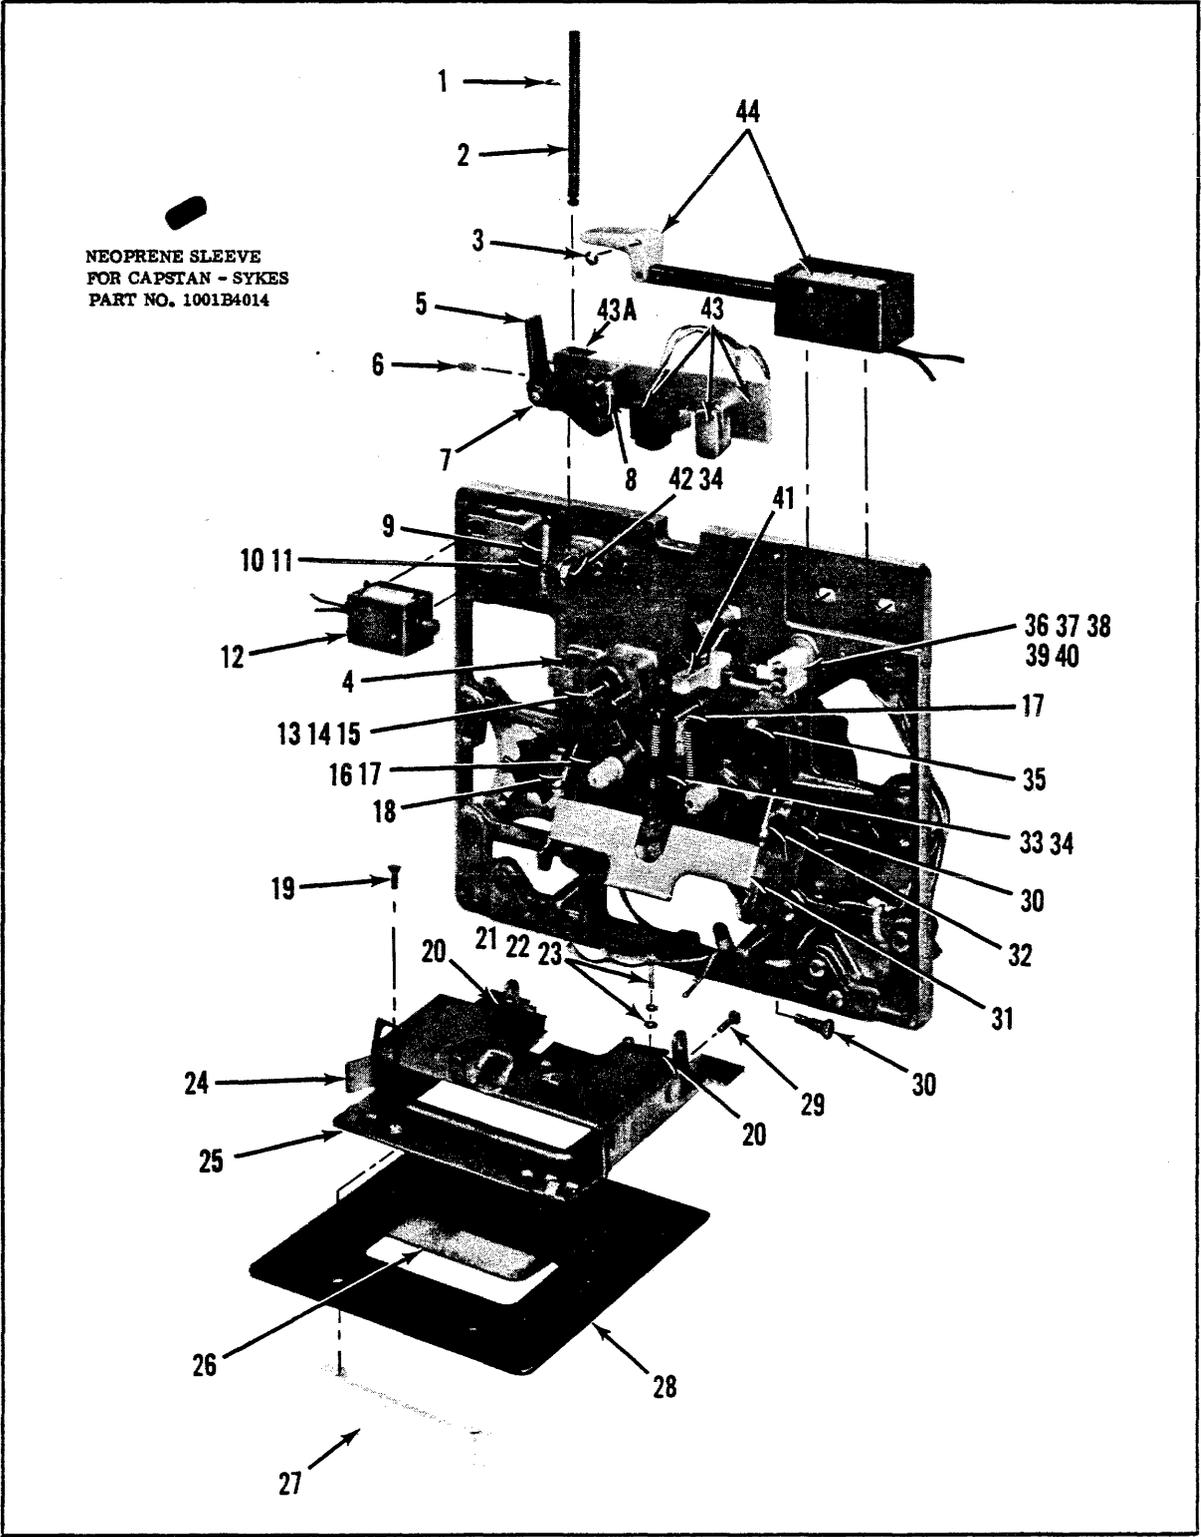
EXPLODED FRONT VIEW OF TT120 TRANSPORT
